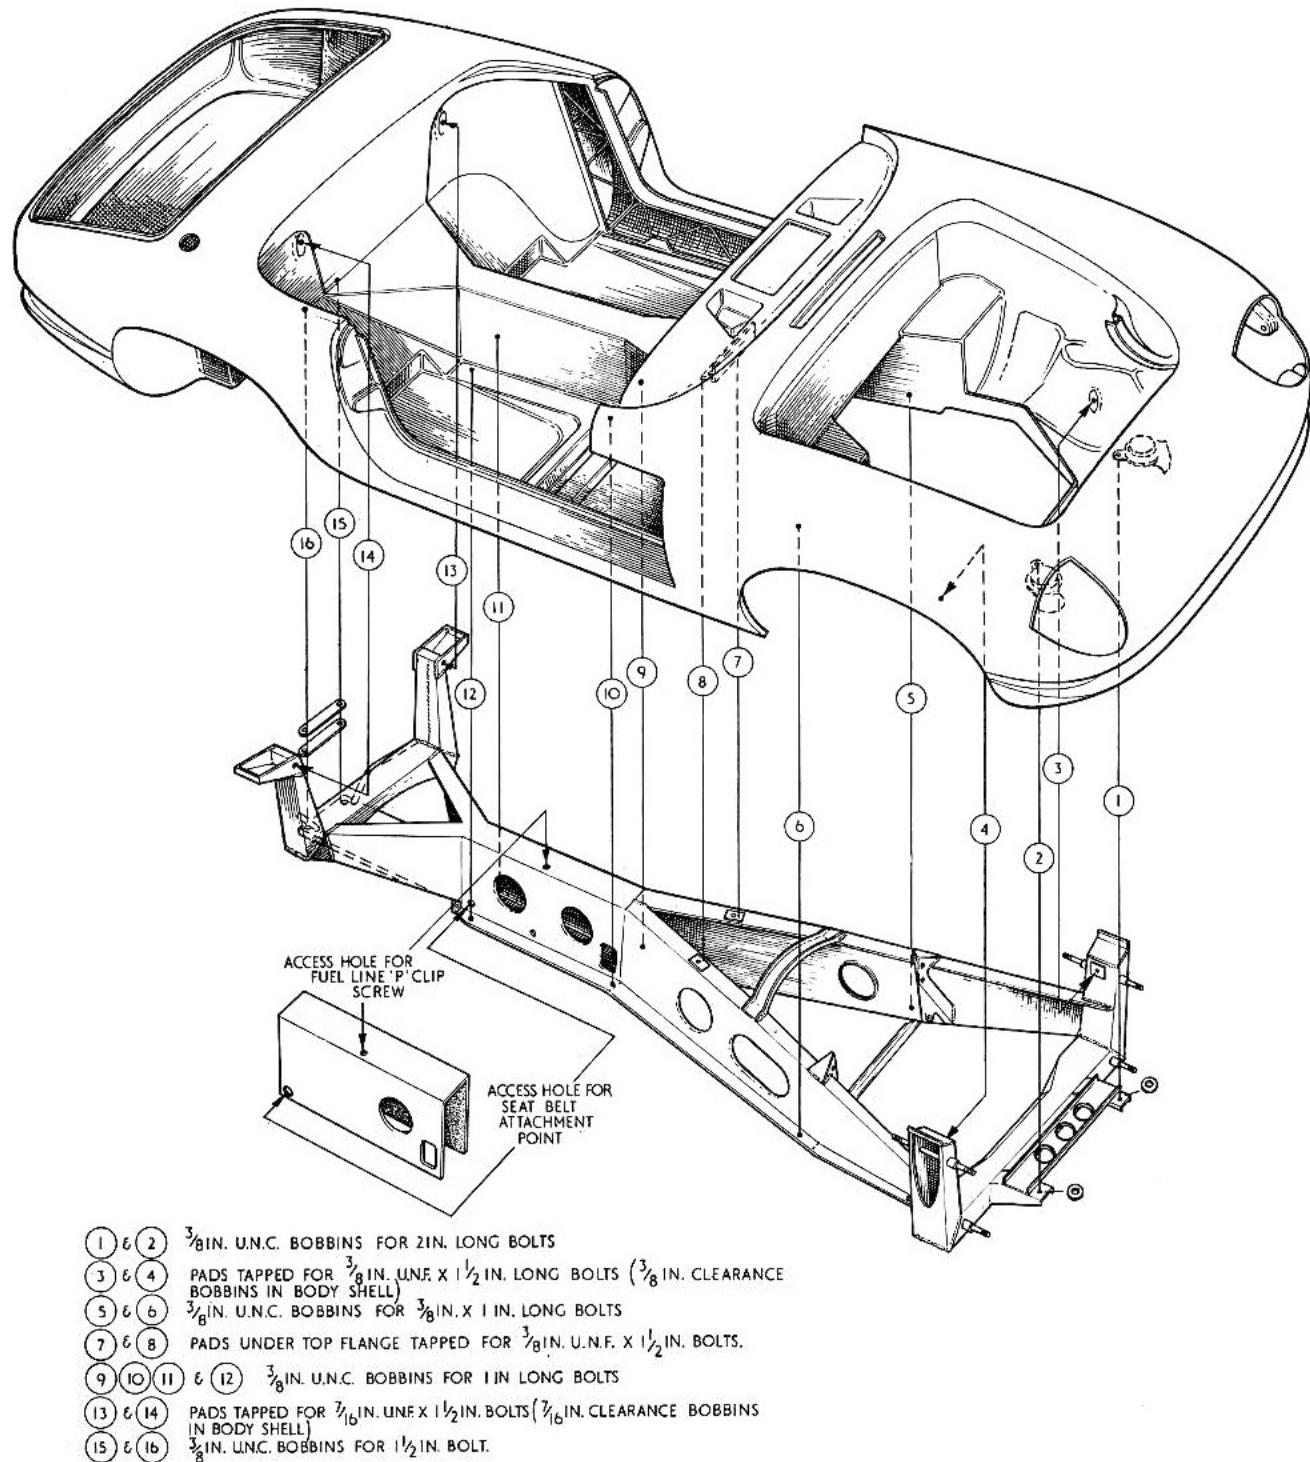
CHASSIS TO BODY ATTACHMENT POINTS
